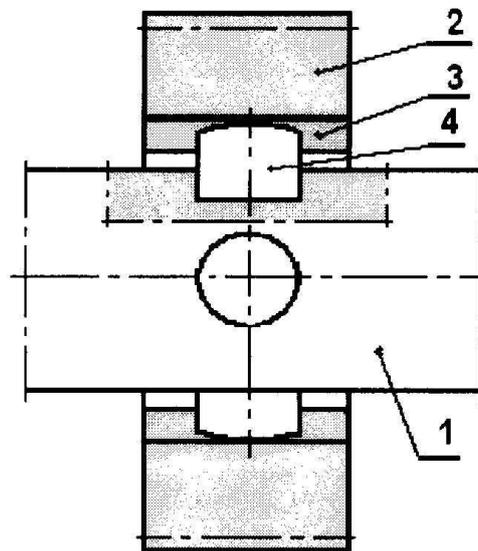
Diagram of oscillating wheel setting on the shaft, using four cylinders. Description of indications: 1) shaft's journal; 2) toothed gear; 3) groove with rectangular cross section; 4) cylinder [10]
